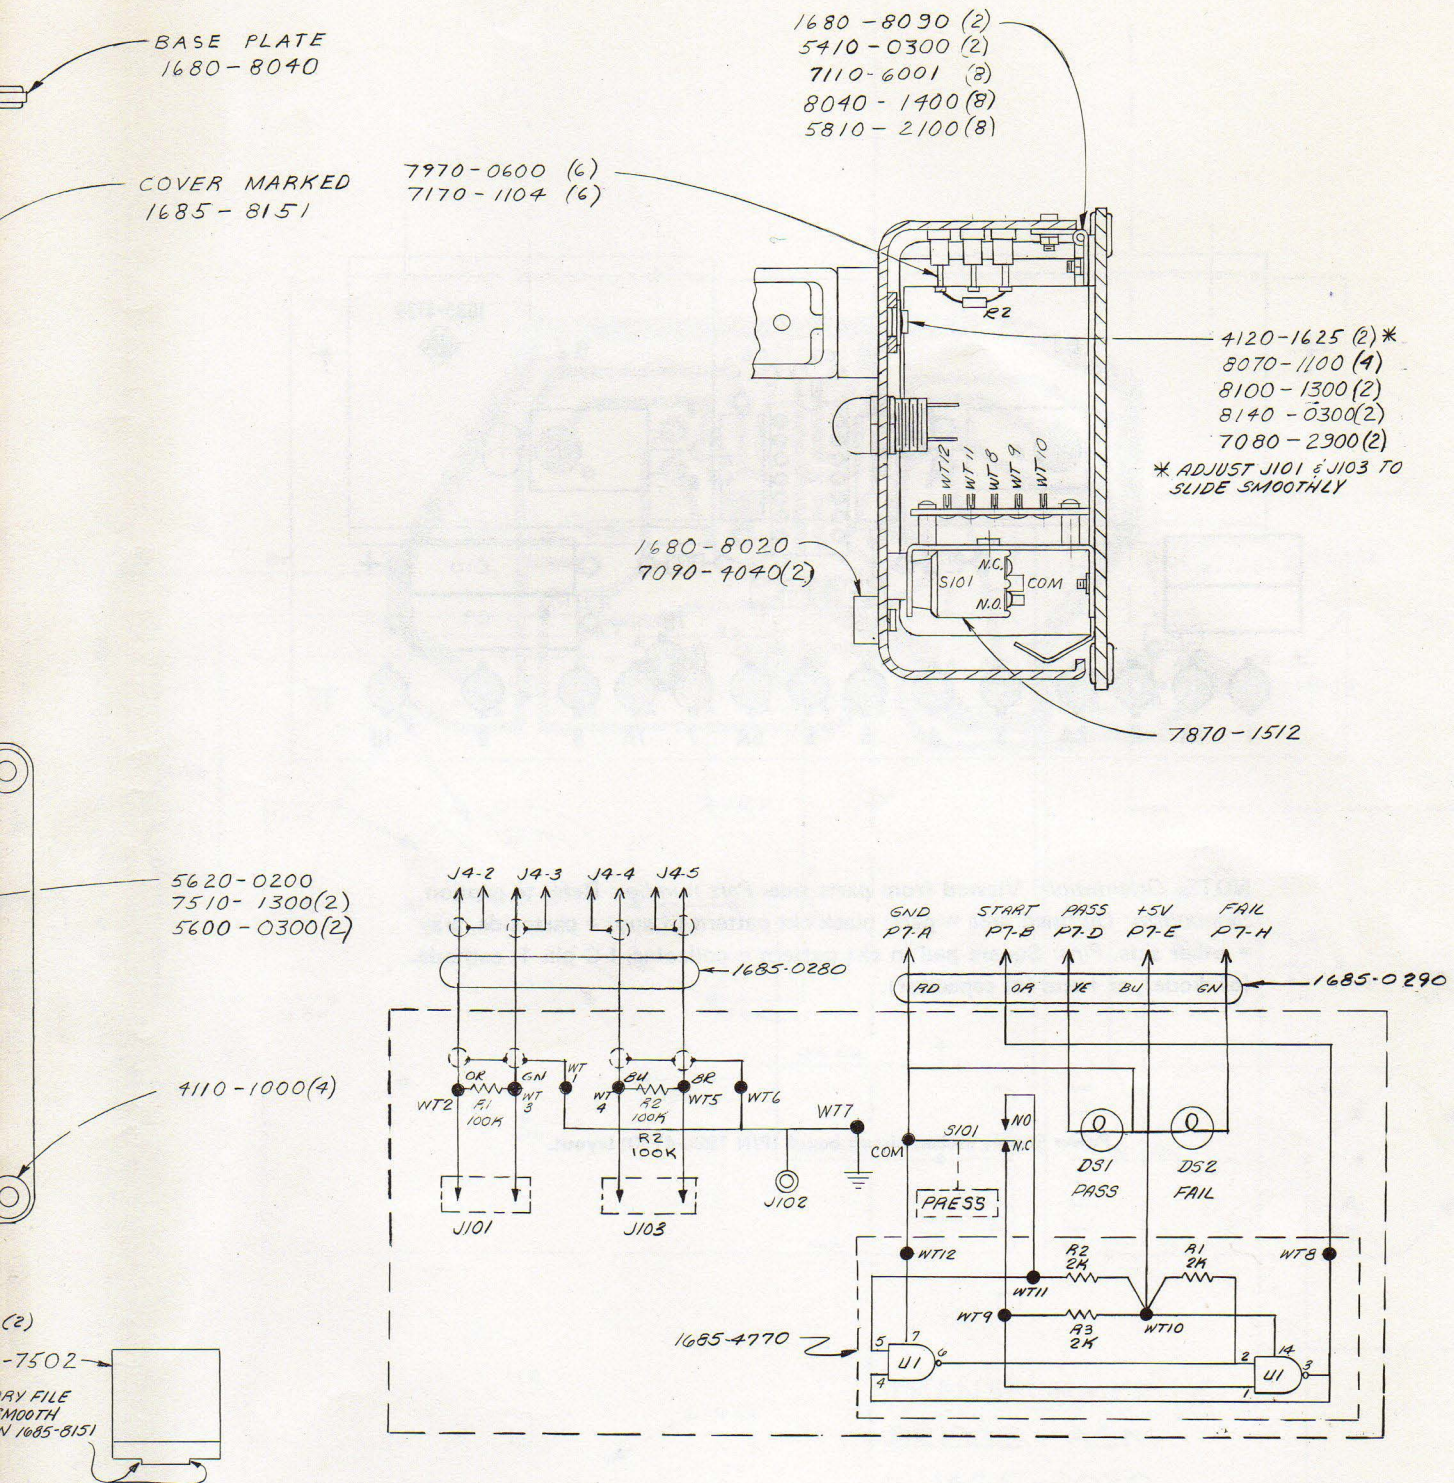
1685-P1 Test Fixture schematic diagram.
